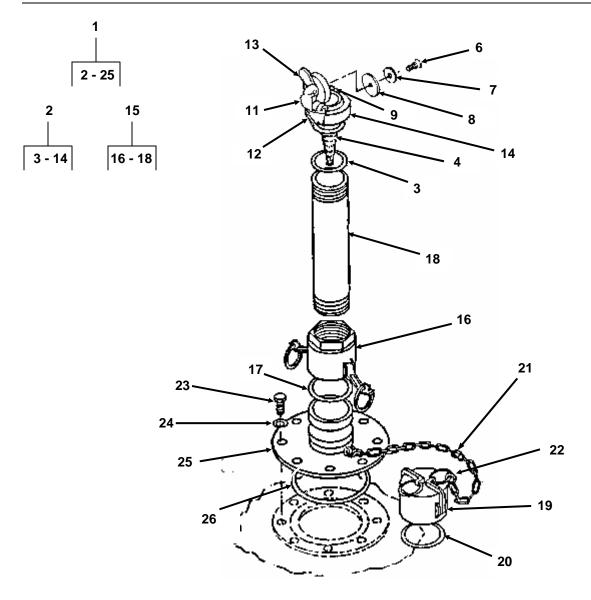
Vent Fitting Assembly (Model GTA-210KF)
